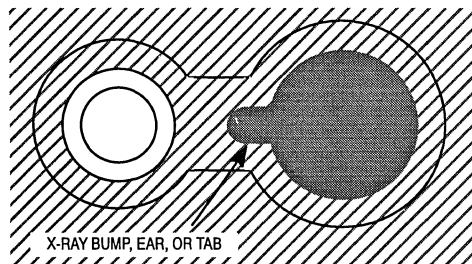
PBGA Pad with Bump to Facilitate X-ray Inspection
